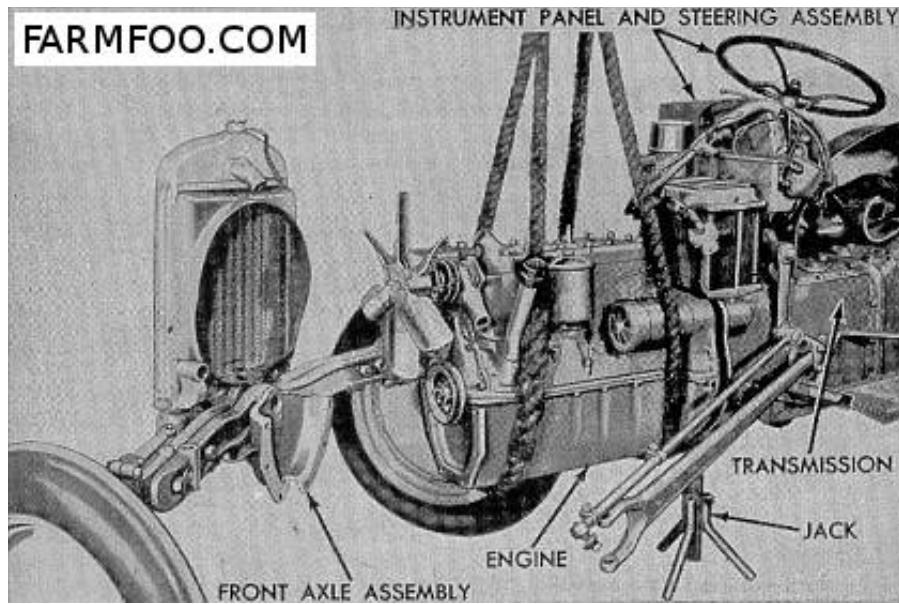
Method of removing engine on models 2N-8N-9N.
